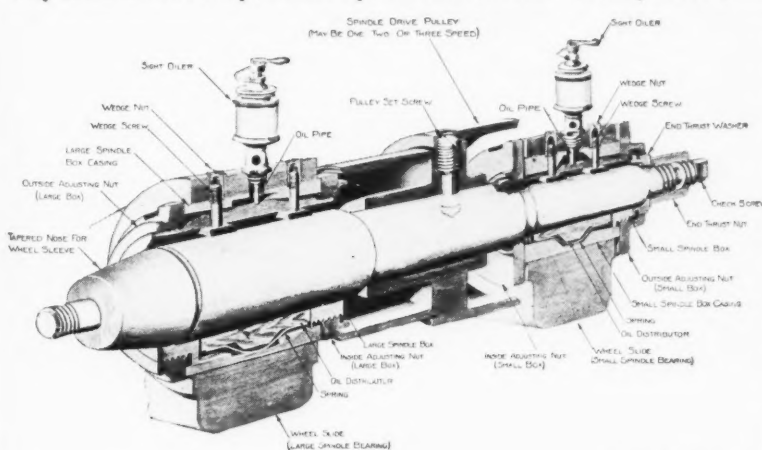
Details of a grinding machine spindle showing in particular the bearing construction, the oil distributors and the sight feed oilers.
